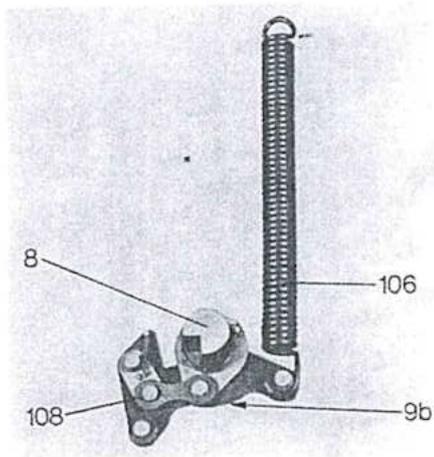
A: Trip mechanism with tension spring. Toggle-joint collapsed.
